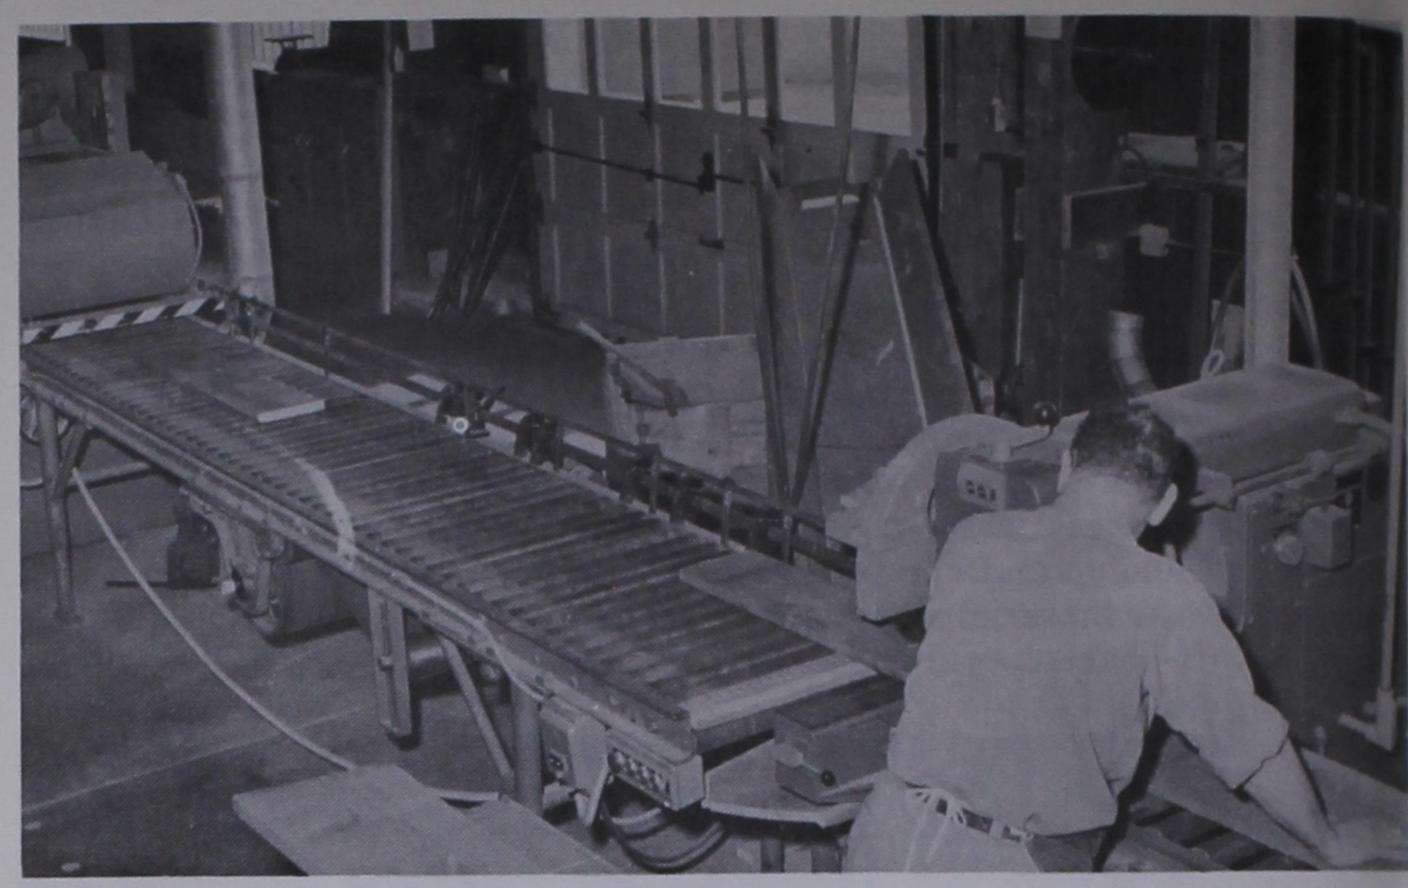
Hydraulic cutoff saw, live-roll conveyor, and facing planer used in method B.
